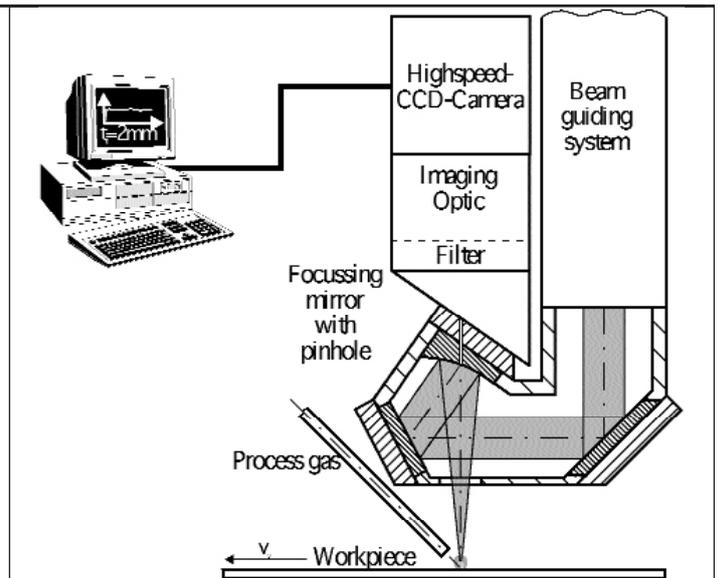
(above) Principle of the sensor for on-line measurement of the keyhole geometry (CO_2 -laser version)
